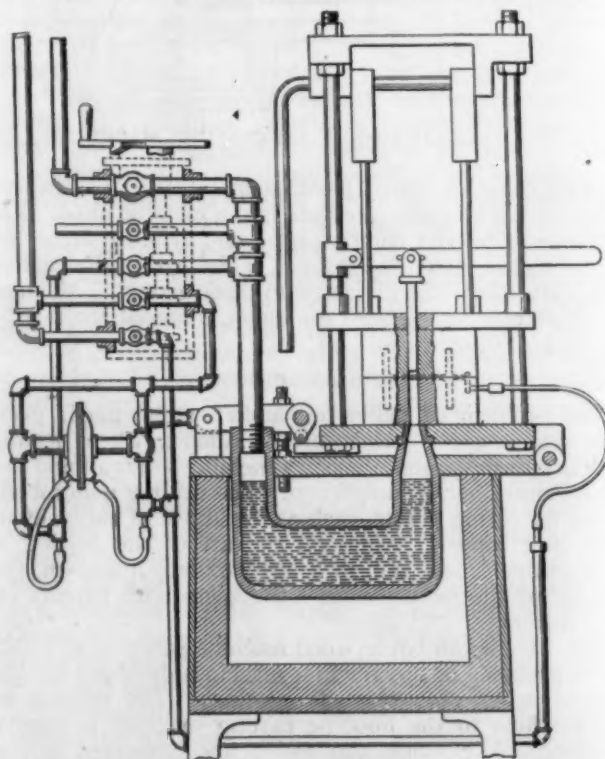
ANOTHER TYPE OF COMPRESSED-AIR MACHINE.
